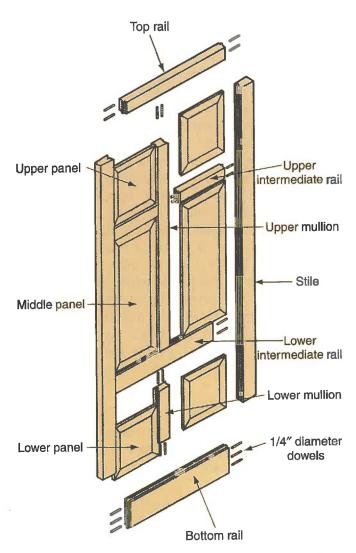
Learn the individual part names of a frame and panel assembly. (Shopsmith, Inc.)
